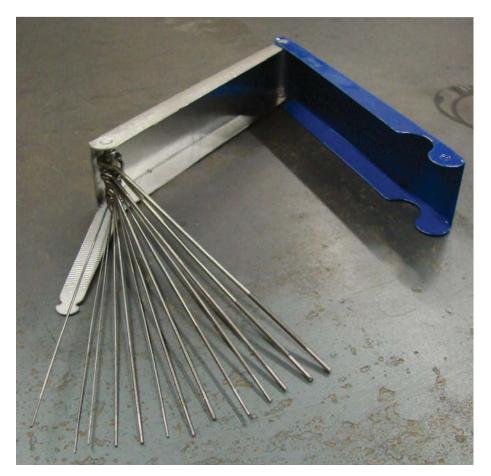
Oxyacetylene cutting torch tip cleaner.
